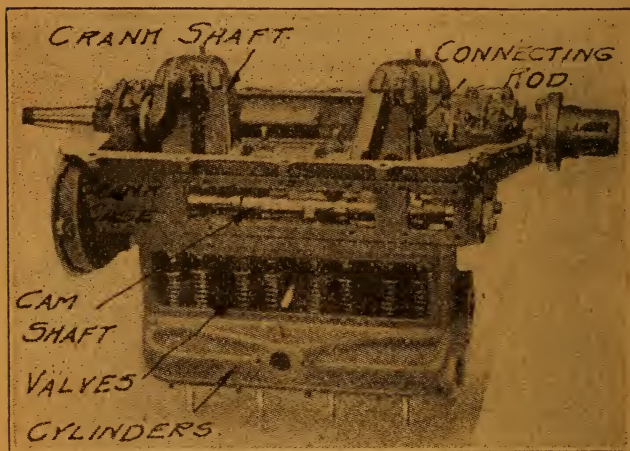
Camshaft, crankshaft, crankcase and cylinder assembly of a four-cylinder engine.
